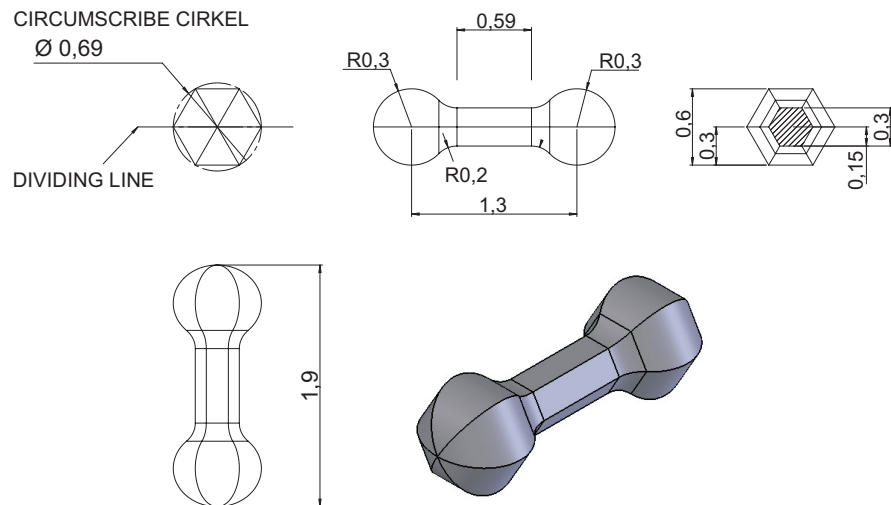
Technical drawing of the axle component. The general tolerances are $\pm 20\mu m$ on most geometrical elements
